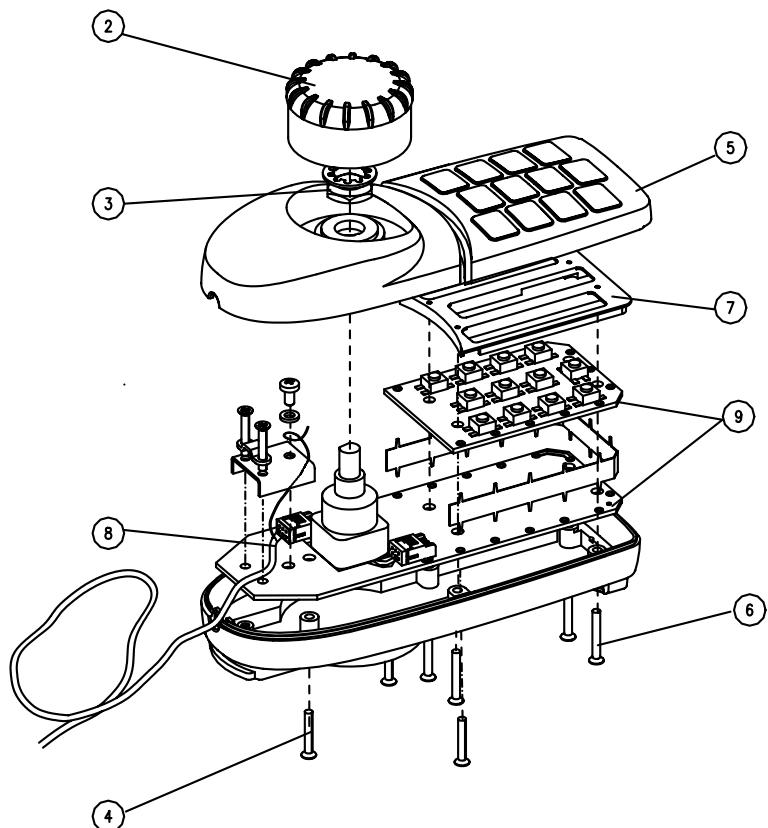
K-REMCO, K-CREMCO disassembly and reassembly
